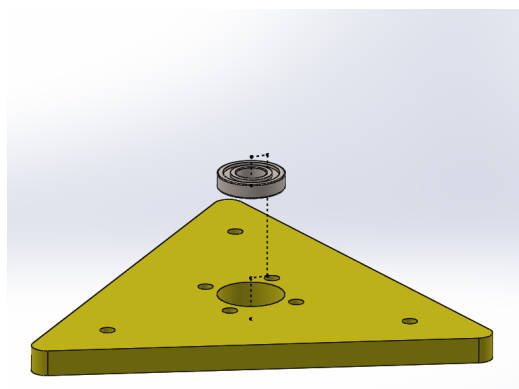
Bearing Press-Fit Into Bottom (Top as Well) Bearing Retainer
